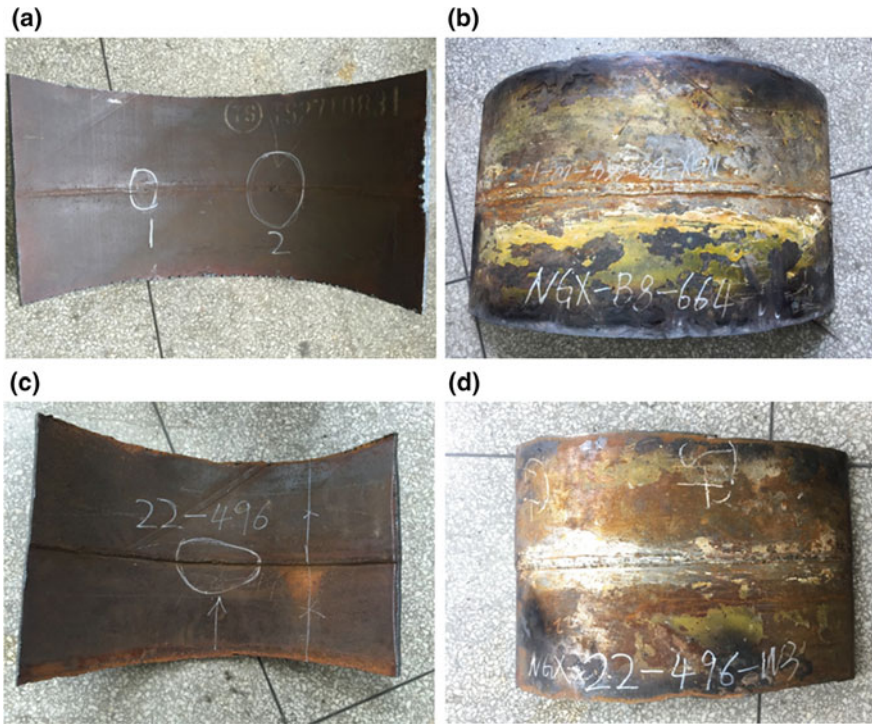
Profile of failed segments; a two defects in the weld of one inner pipe; b outer profile of a; c one defect in the weld of the other inner pipe; d outer profile of c
